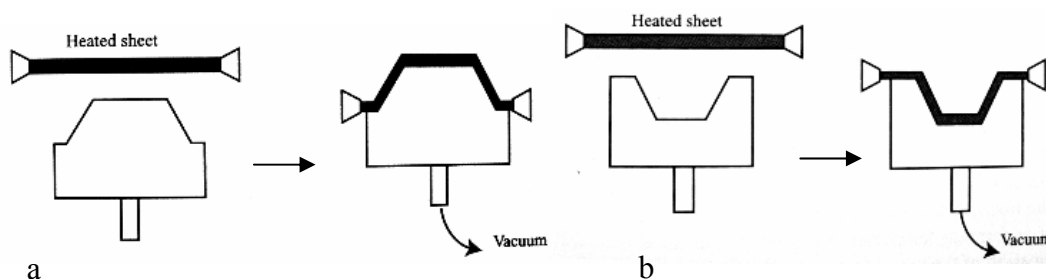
a) Drape forming; b) Vacuum forming
